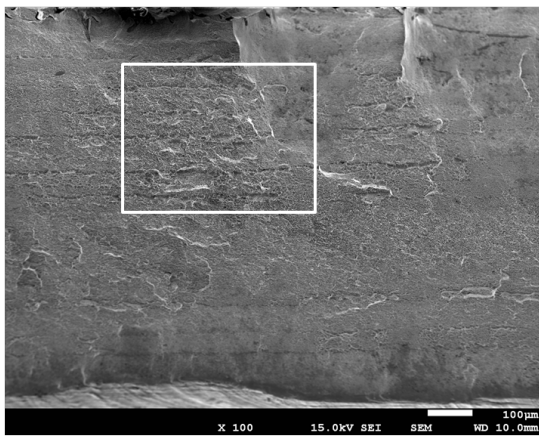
Fractured tensile specimen of a high heat input weld
